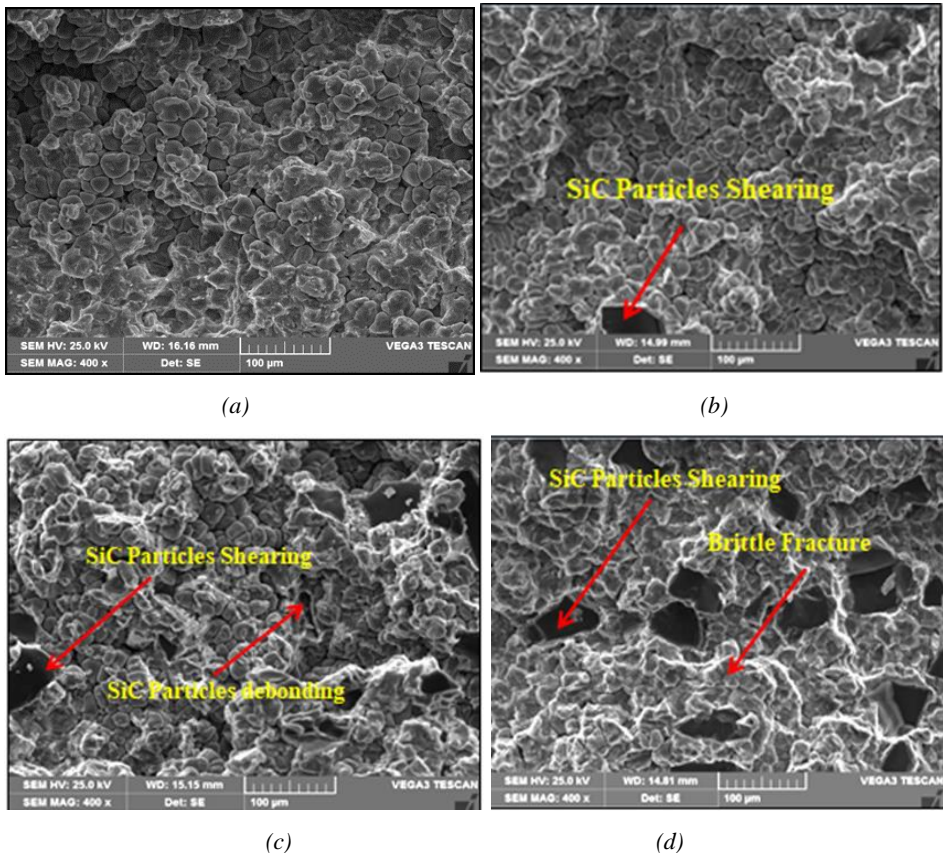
Tensile fracture surfaces SEM micrographs of (a) Al6061 alloy (b) Al6061- 6 wt.% SiC (c) Al6061-9 wt.% SiC & (d) Al6061-12 wt.% SiC composites.
